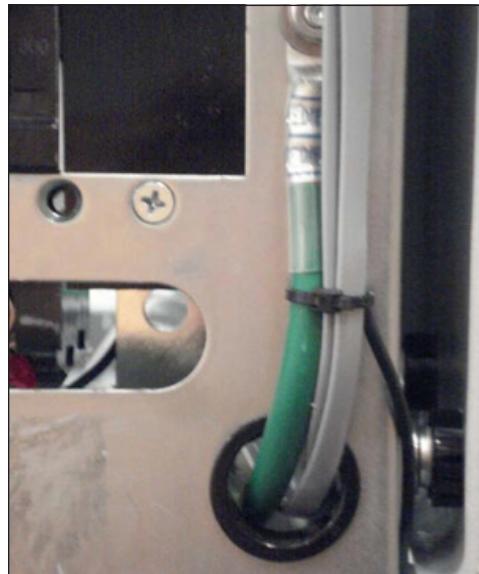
Route temperature sensor cables up through DCX chassis, through grommet hole and up to DCX control PCB jack locations.
